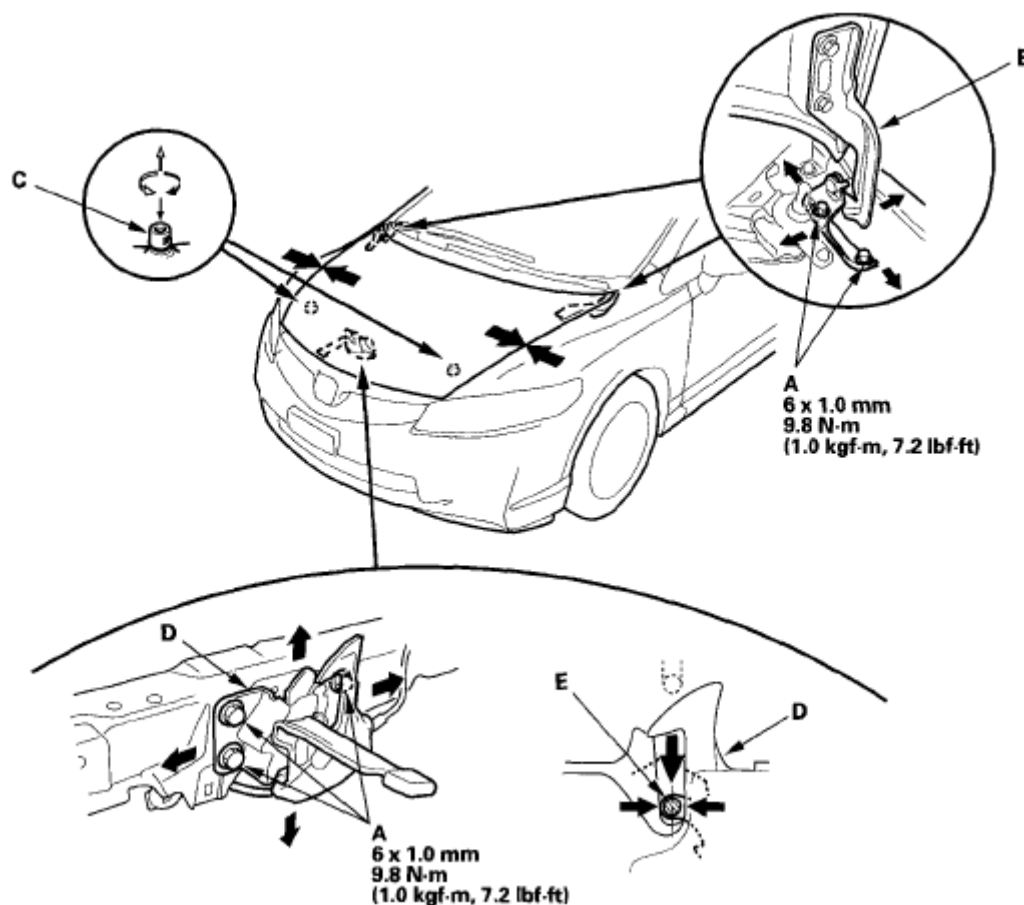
Identifying Hood Edge Cushions, Hood Latch And Bolts (With Torque Specifications)
